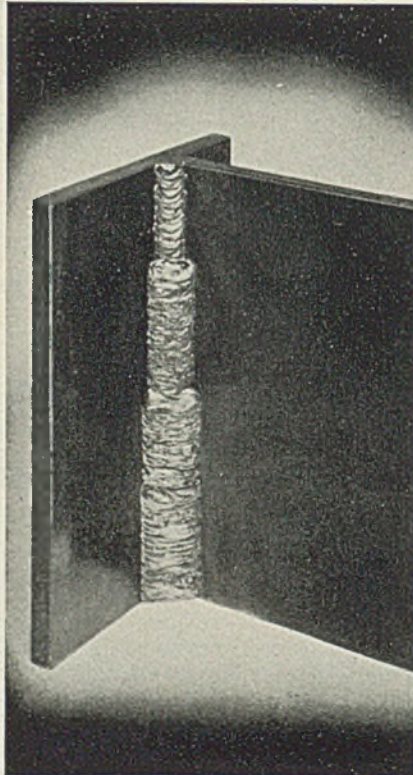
Vertical fillet weld in 3/8-inch plate welded upward. Weaving was used in second and third passes
